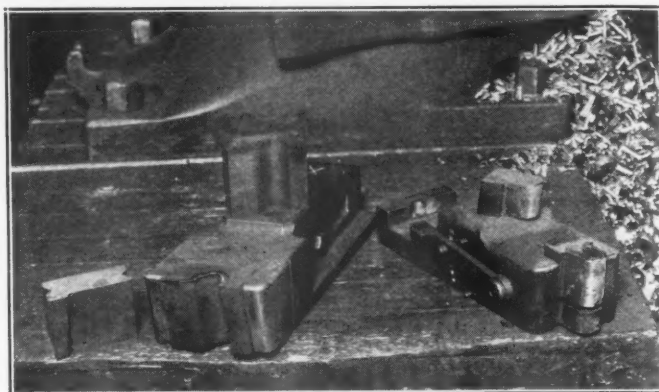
Tool Holders, Tool Bits and Filling Blocks
